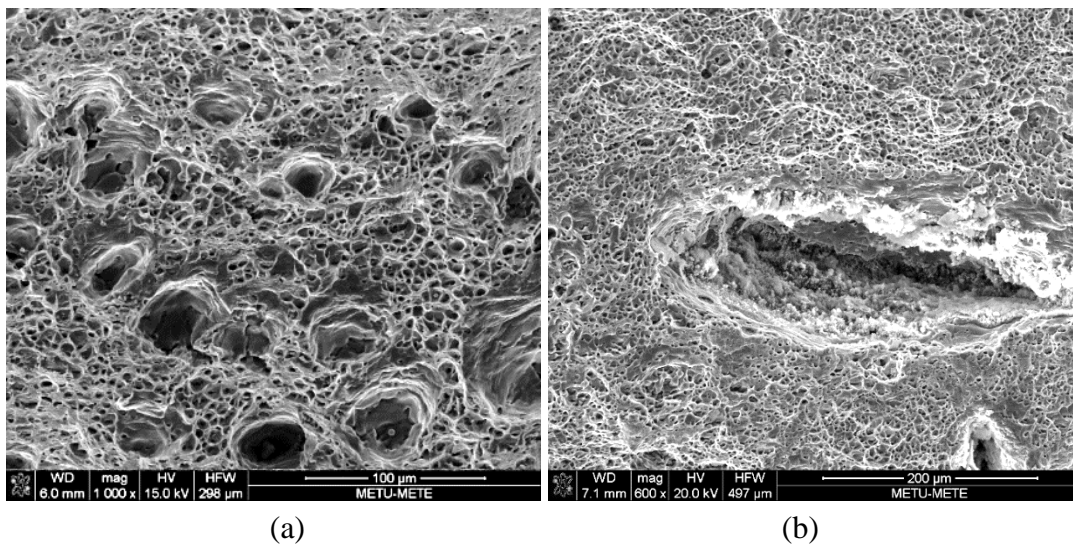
Discontinuities on the fracture surface of the as-welded specimen (tensile test)
